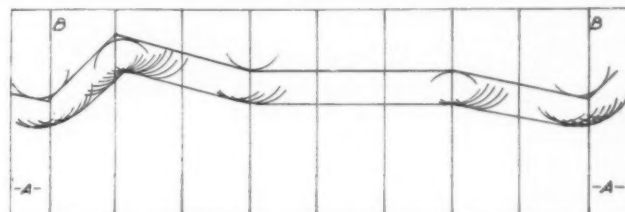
Master cam for a drum type cam incorporating modified uniform rises
